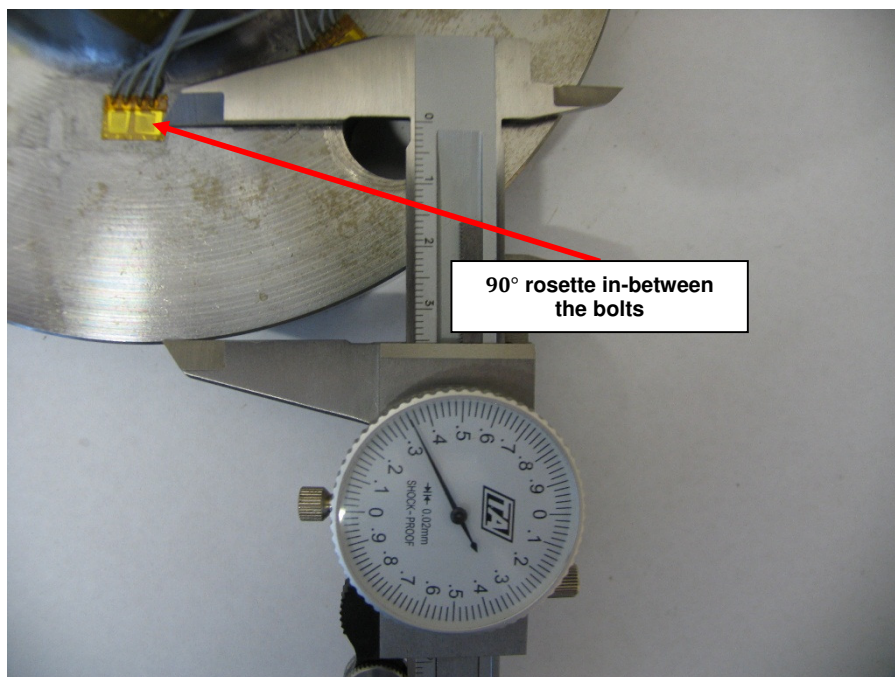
Position, with the perpendicular distance from the edge of the flange, of the 90° rosette in-between the bolts on the ring of the flat face flange
